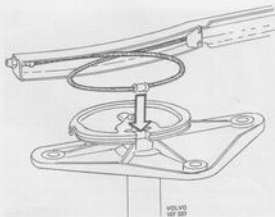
Installing cable for drive link and parallel drive link, left-hand side
